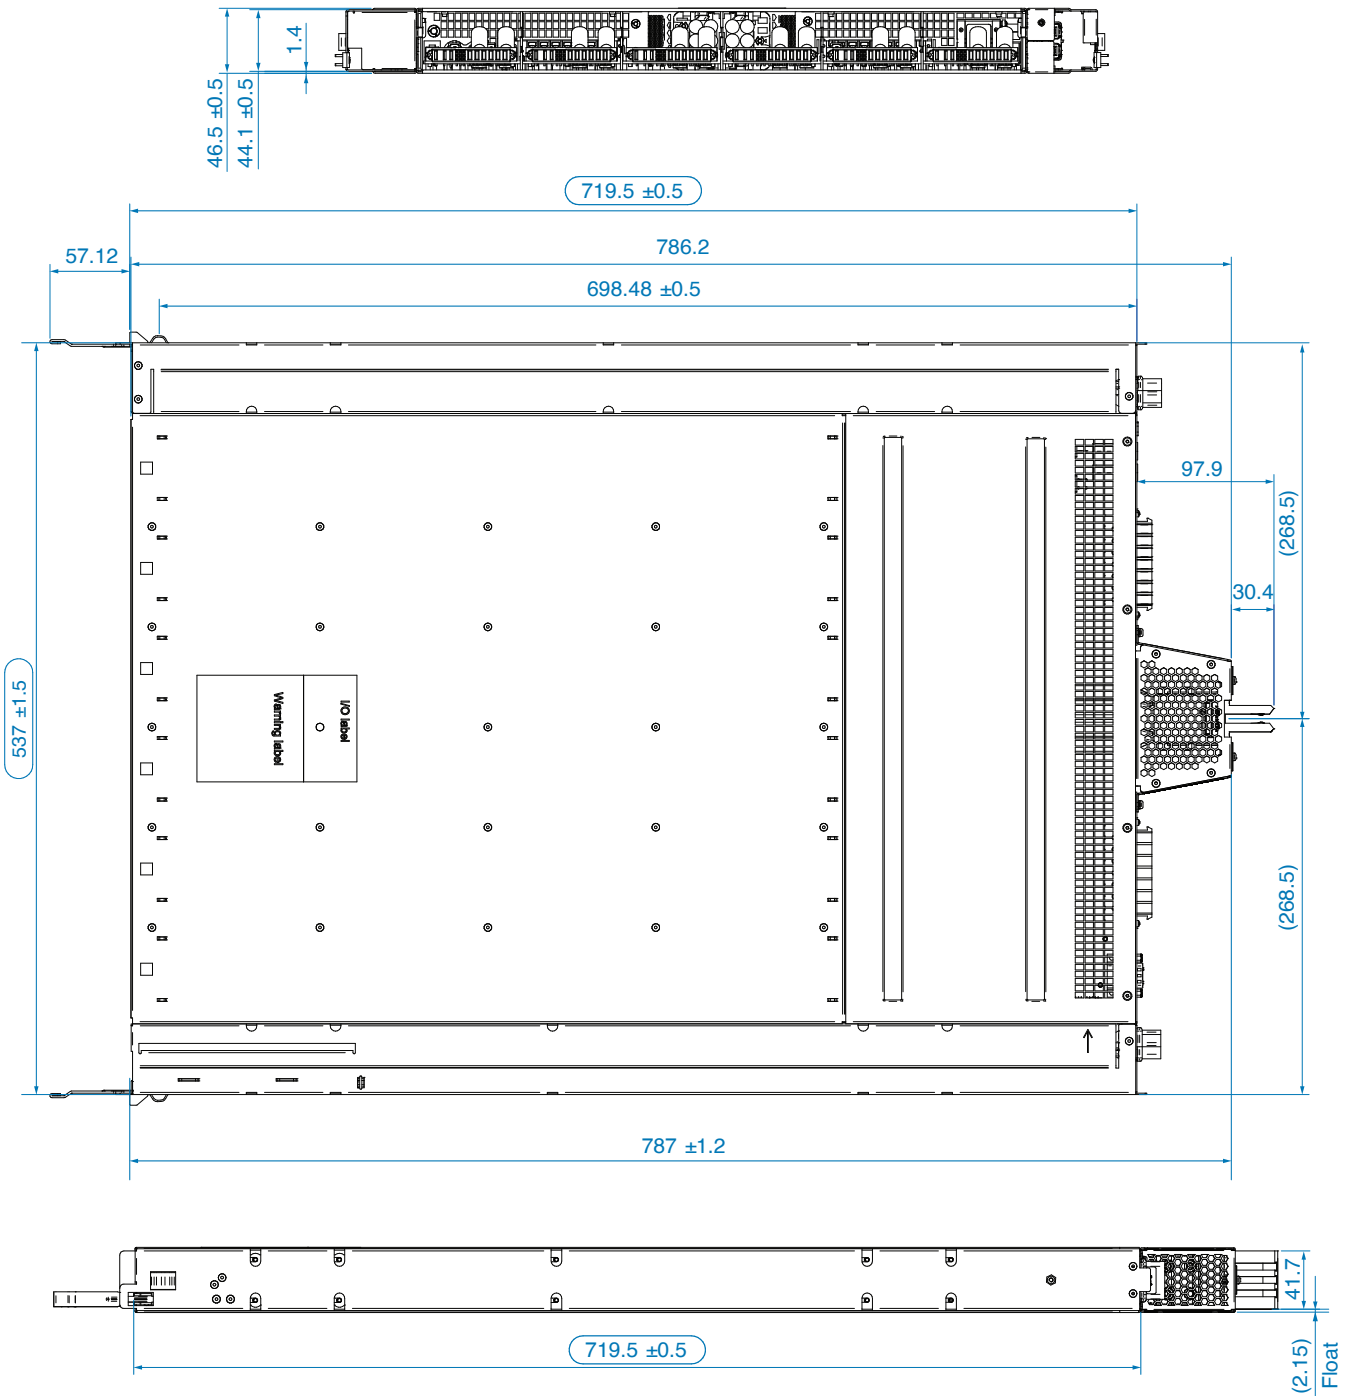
SPSTET4V3-01 Mechanical Drawing with Dimensions (Front, Top, Side View)
